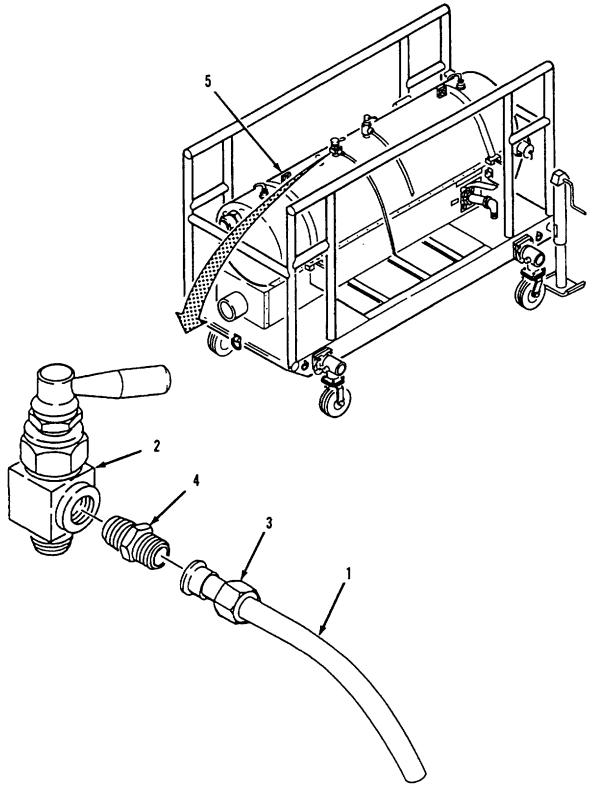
Air Vent and Drain Tube Assembly Replacement.
